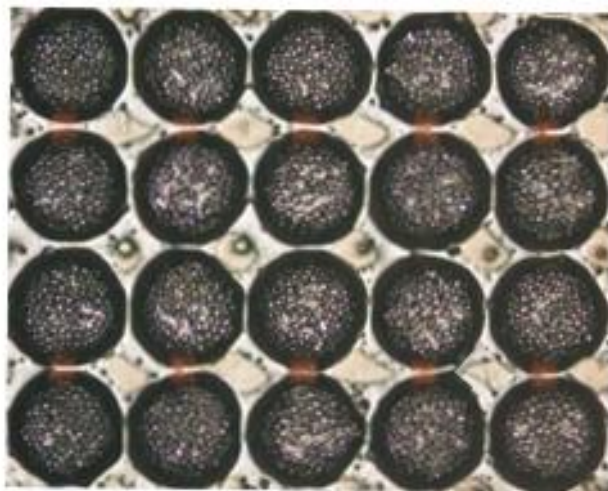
Optical inspection of as-printed BGAs with good paste release, uniform deposit, good paste-to-pad alignment and no observed bridging.
